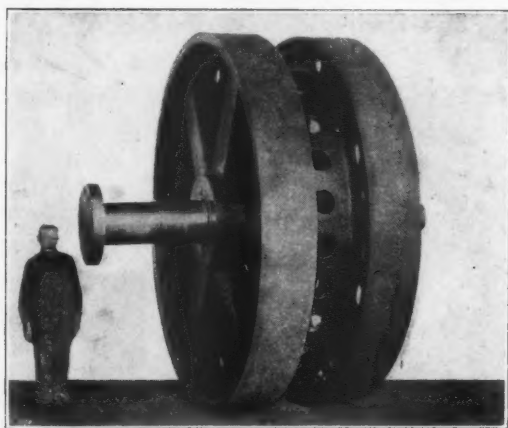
GEAR CUT FROM BLANK SHOWN IN FIG. 3
